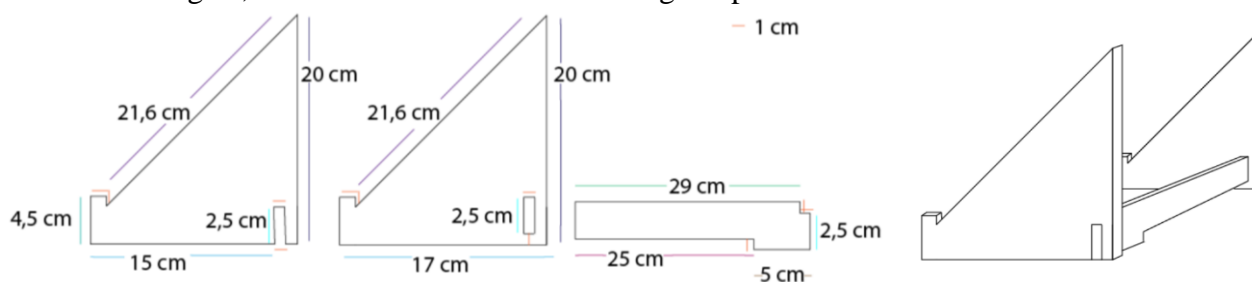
Pieces and measures of the travelling set-up and final assembly.
